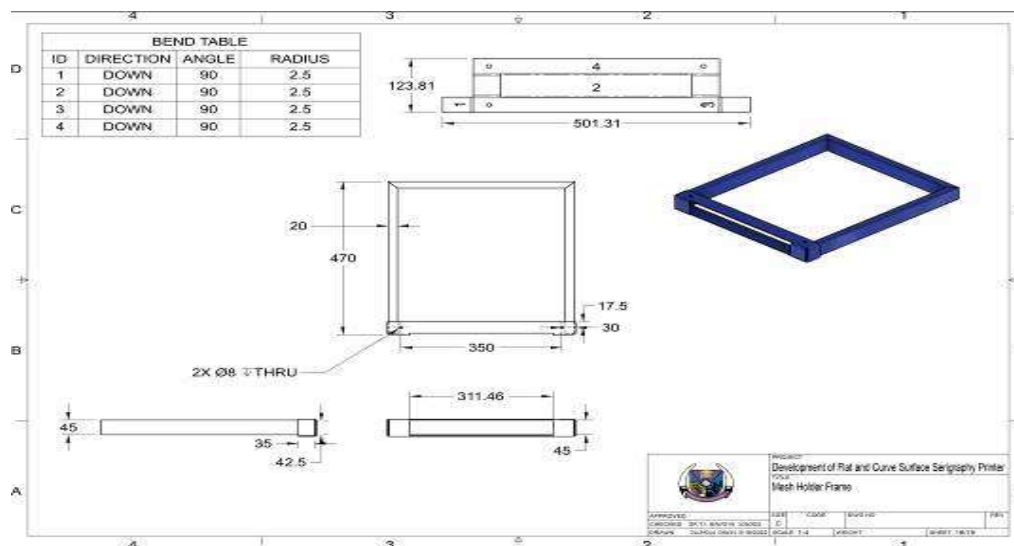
Detailed Drawings of the mesh holder for curved surfaces
